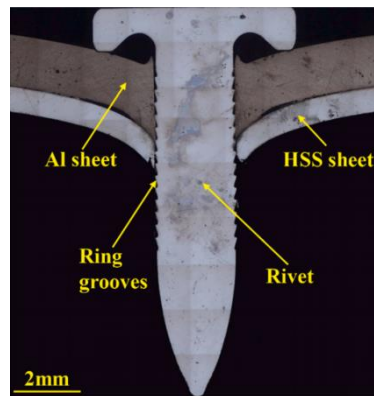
E-HSN equipment and cross-section geometry: the cross-section geometry of the joint. [30].
